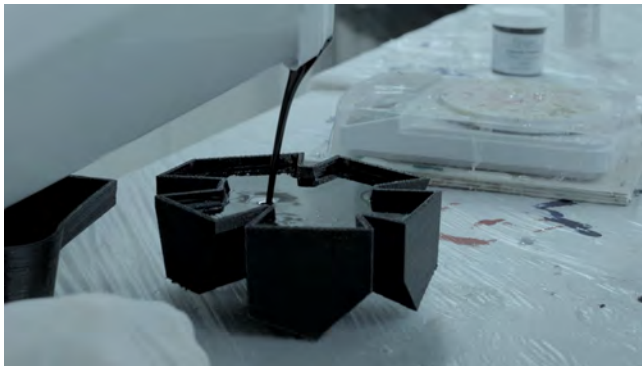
Joint detail: Epoxy resin casting inside 3d-printed mold.
